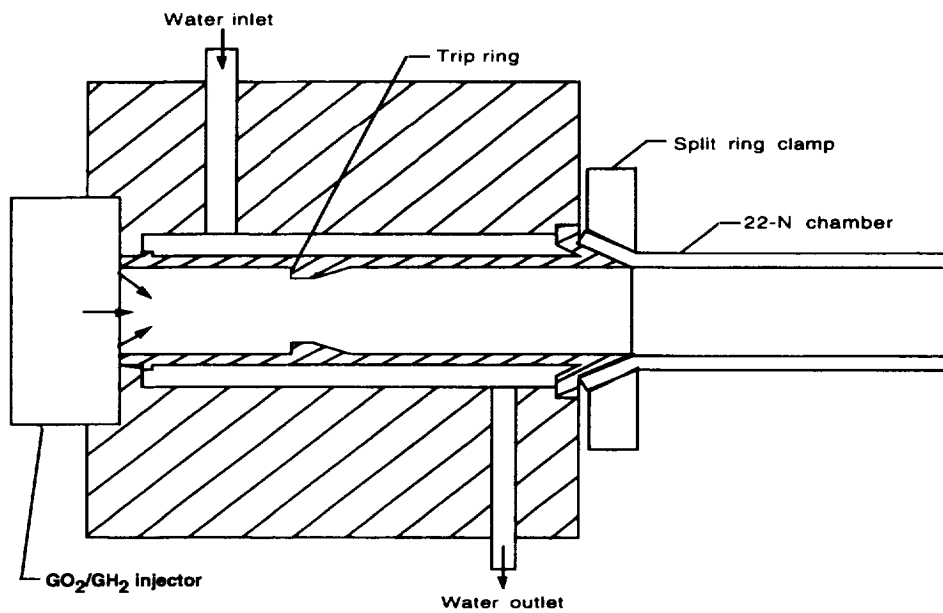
Injector assembly for testing 22-N rocket chambers. (Sketch not drawn to scale.)
